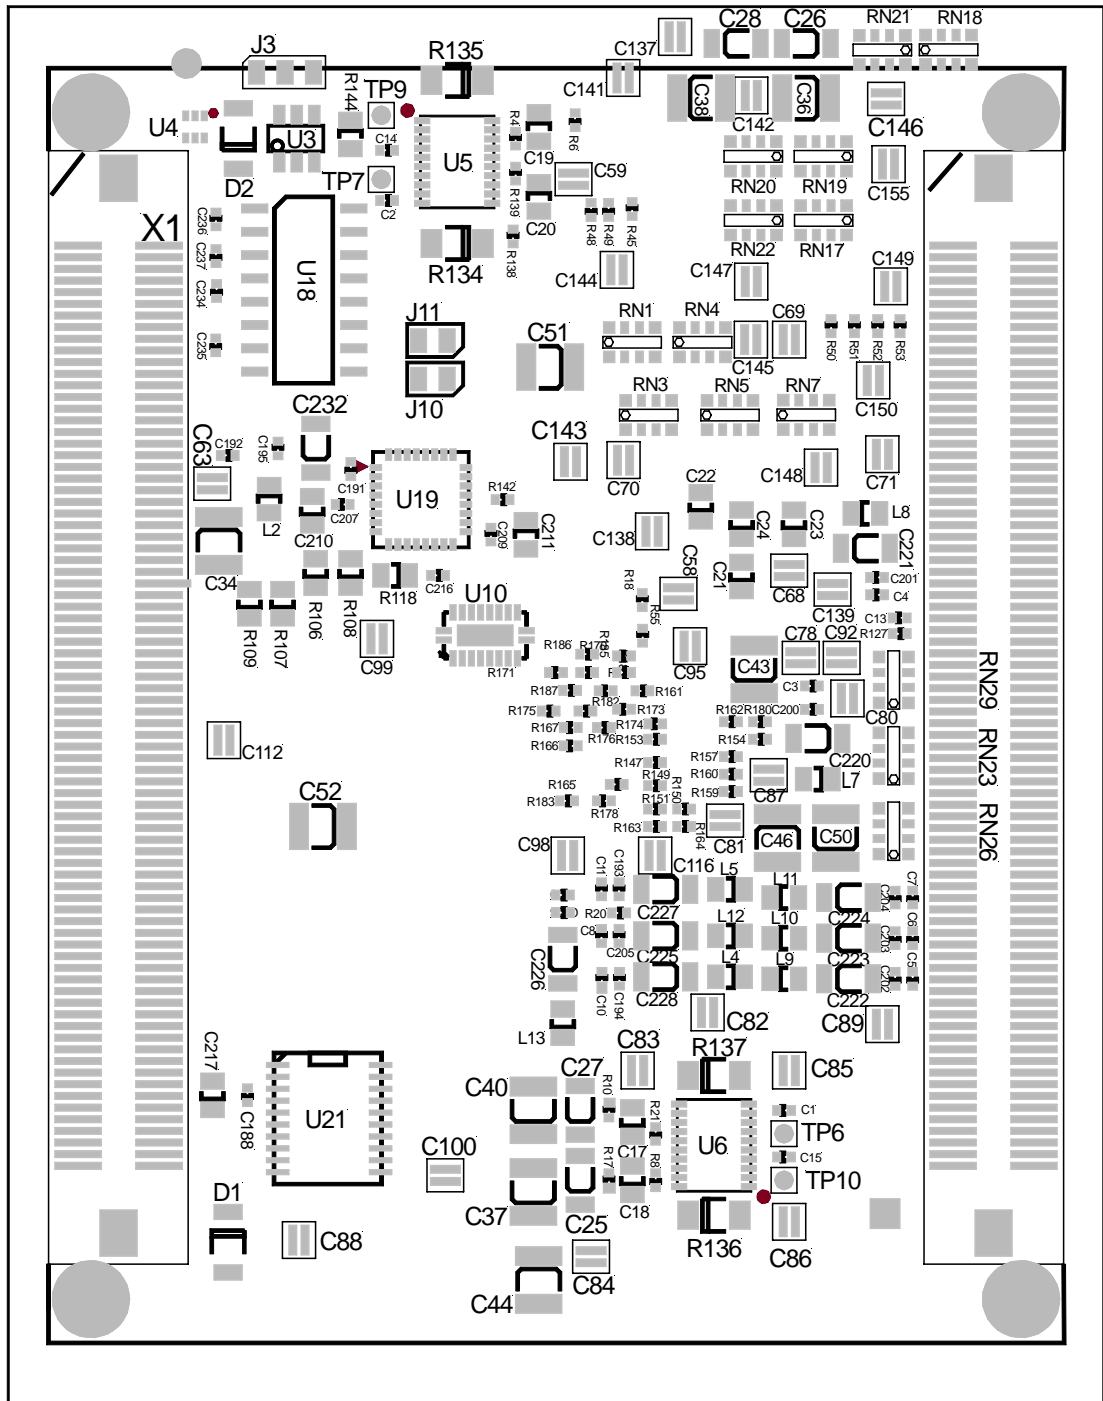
Bottom-View of the phyCORE-MPC5121e/3-tiny PCB Rev. 1326.1
